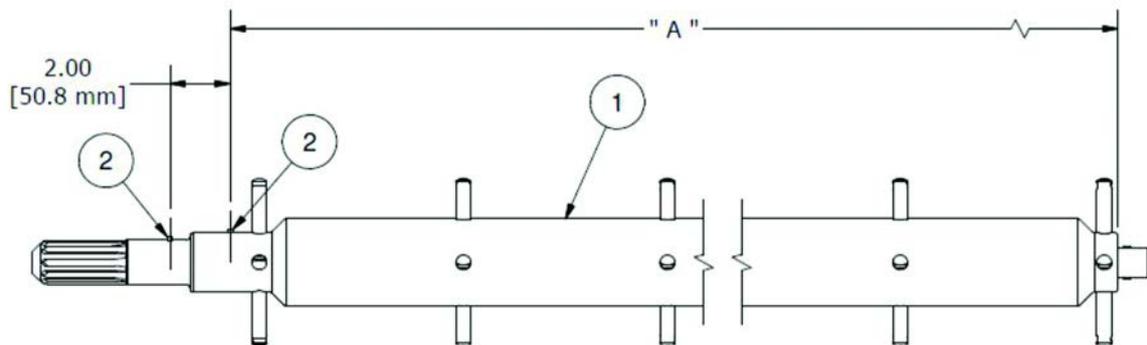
Seal Pin Locations for Rotors with Internal Bearings
